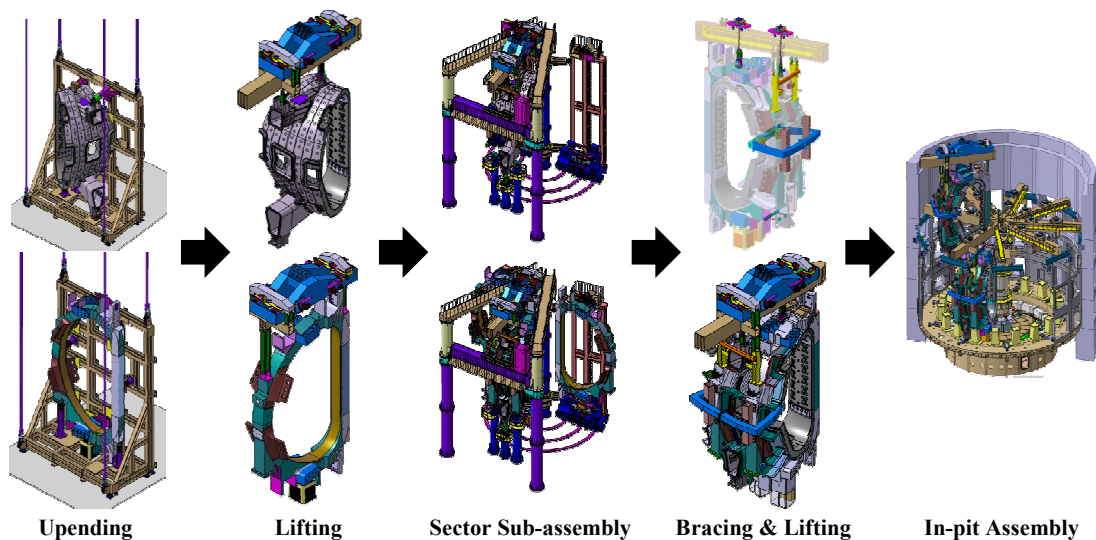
Overall configuration of the sector sub-assembly and in-pit tools
